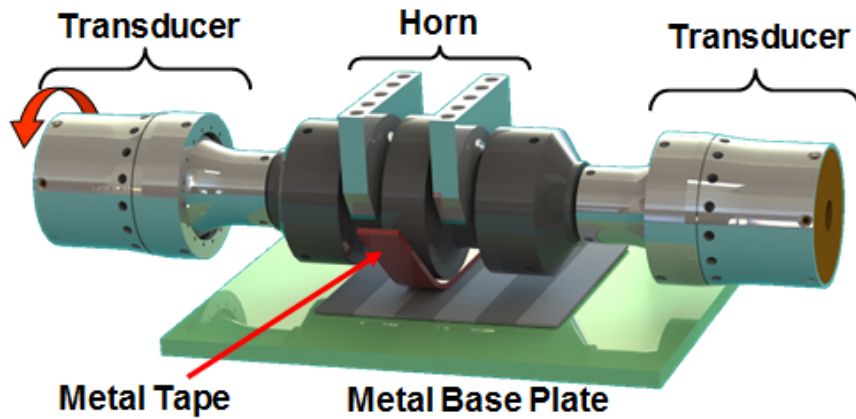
UAM Weld assembly. The horn is driven by piezoelectric transducers as it rolls over metal tapes to create a solid state bond
